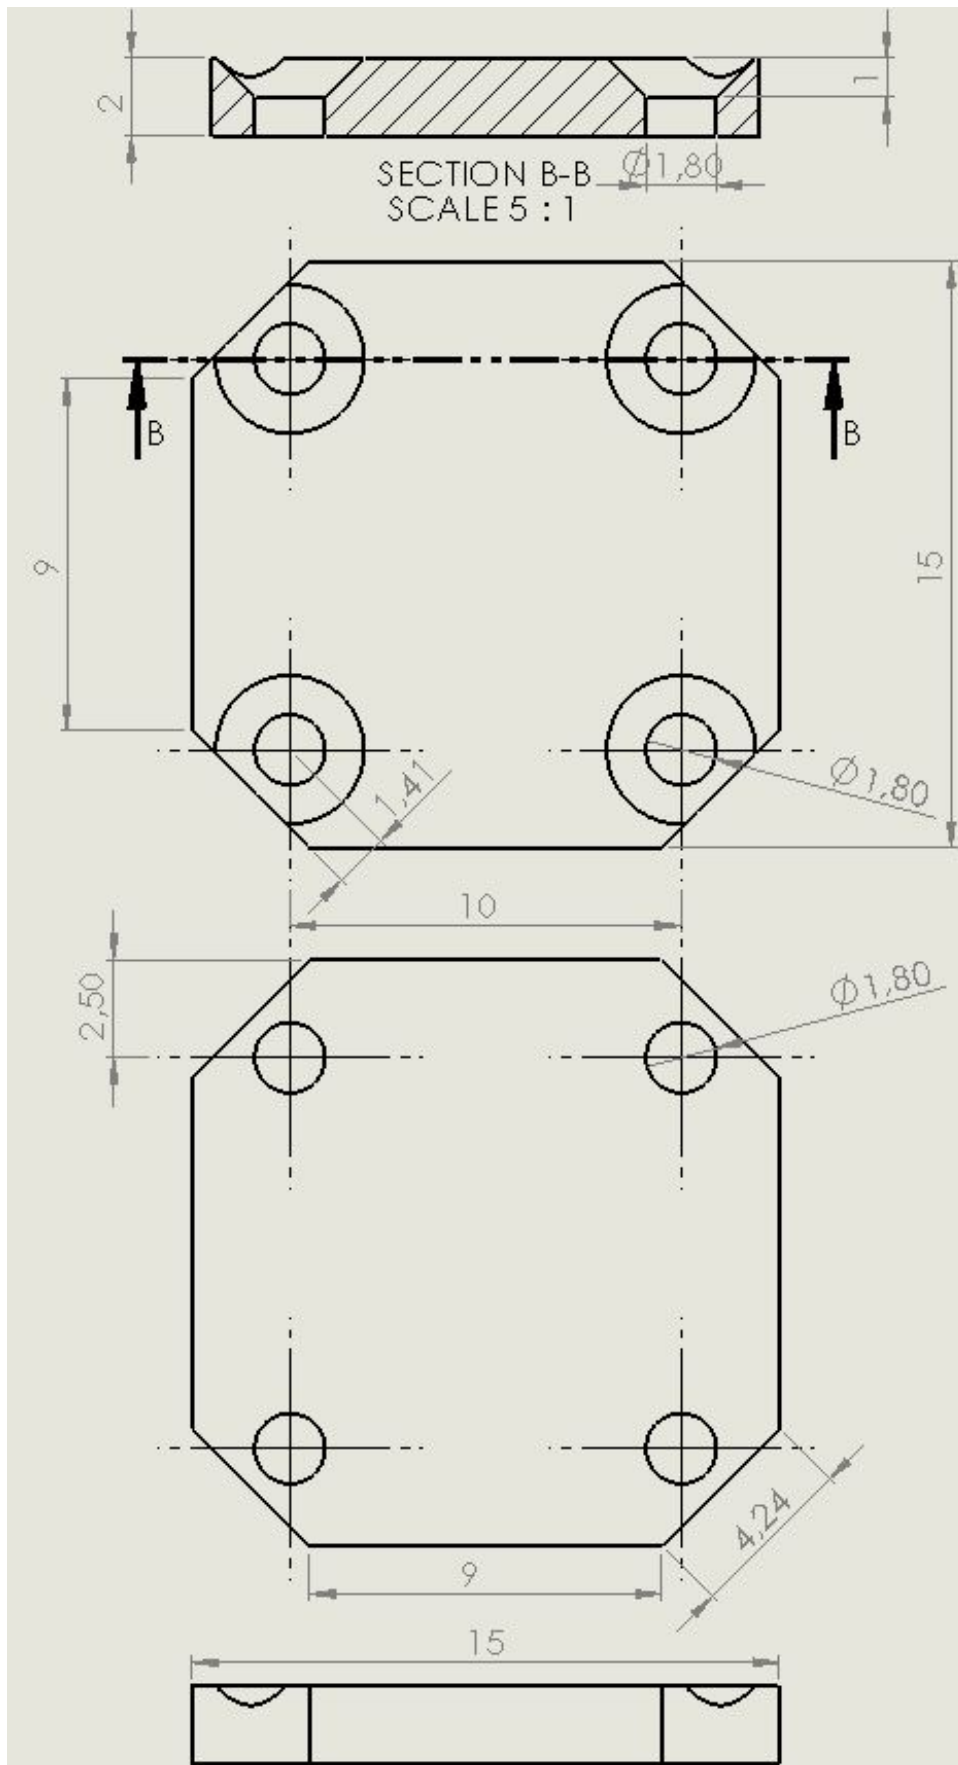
Solidworks model drawing of the prism mounting plate used in the inner frame of the cryostat holder
